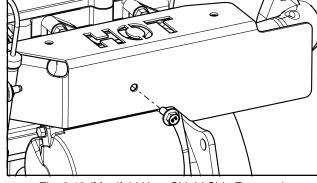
(Manifold Heat Shield Side Fastener)
